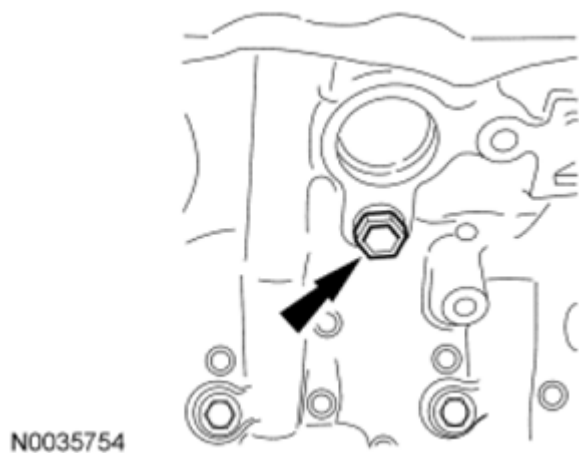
Locating Engine Block Drain Plug And Mounting Bolt
